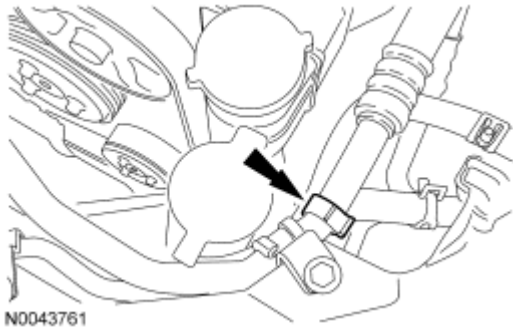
Locating Coolant Vent Hose Retaining Clip
